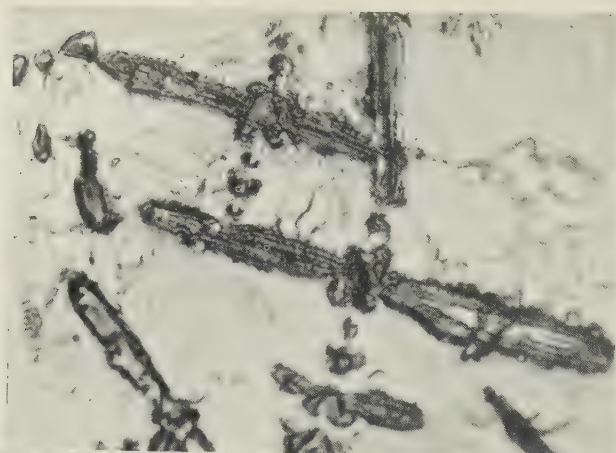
Fractograph of Interface of Weld Shown in Fig. 13. Unetched.  $\times 750$ .
